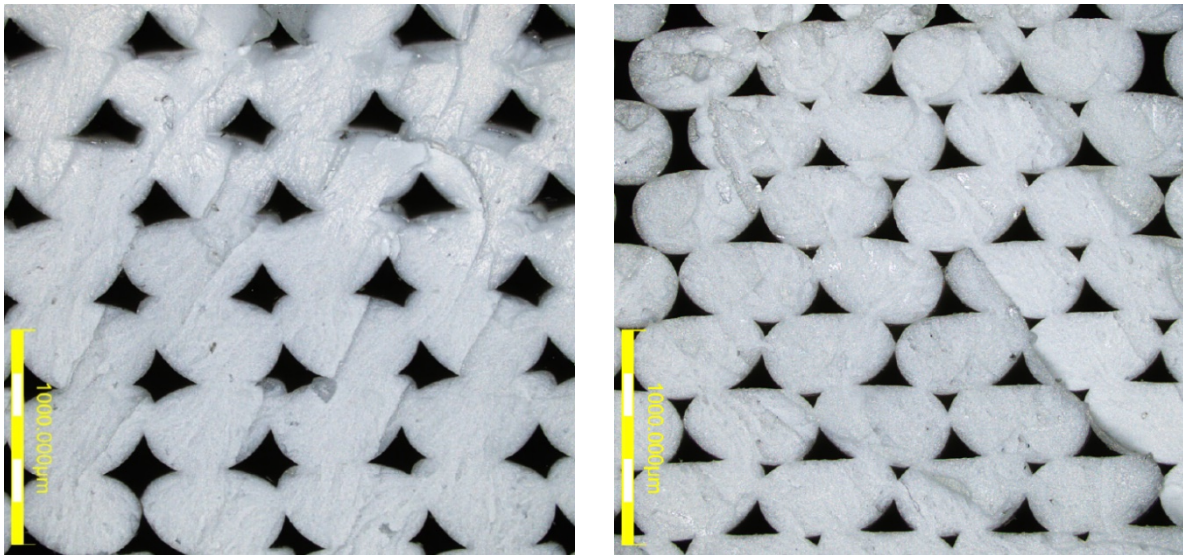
Cross section of samples fabricated using the aligned (left) and offset method (right) for the 0.6mm nozzle size.
